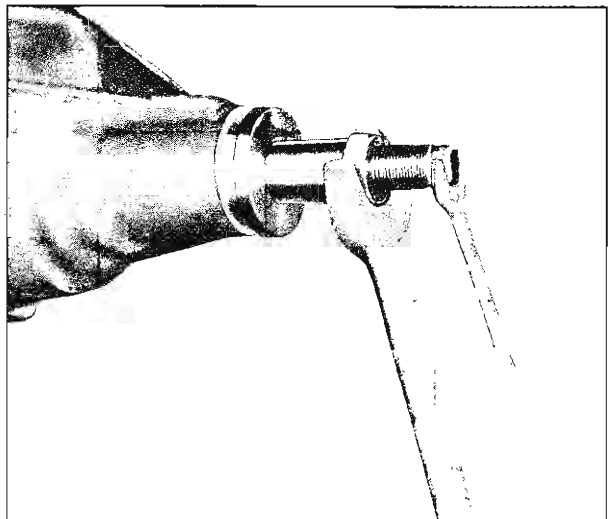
Drive Pinion Flange Oil Seal Installation (Light-Duty)
